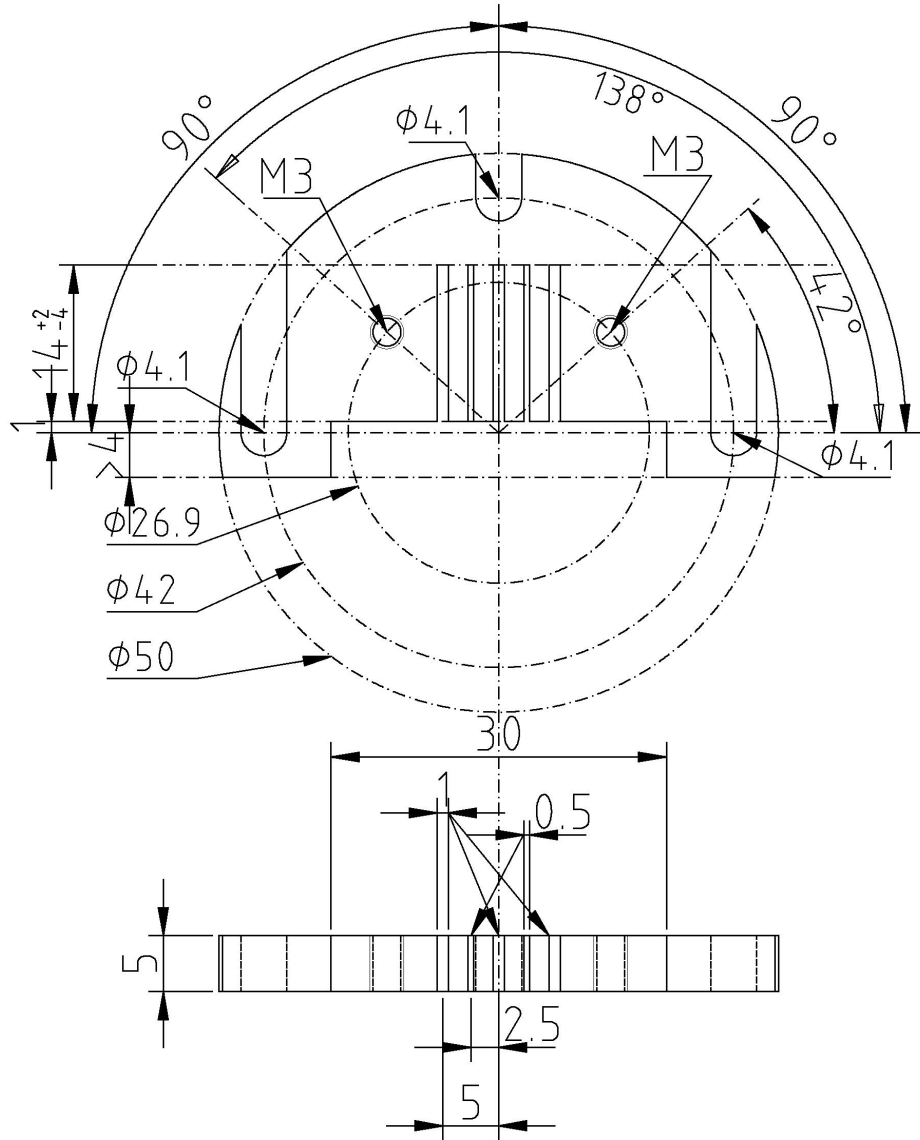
Screws to align the ceramic tubes which hold the Ta crucible, [CD:\Drawings\HT\_Source\Tube\_Fixation\_Screw.dxf]; Layers used: HT fixation tubes screw TOPdimensioning
